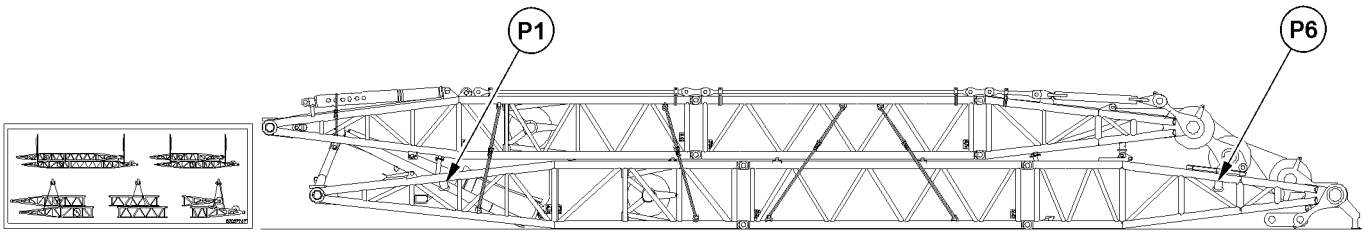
Fastening points Transport unit T1, T2 and T3 assembled
